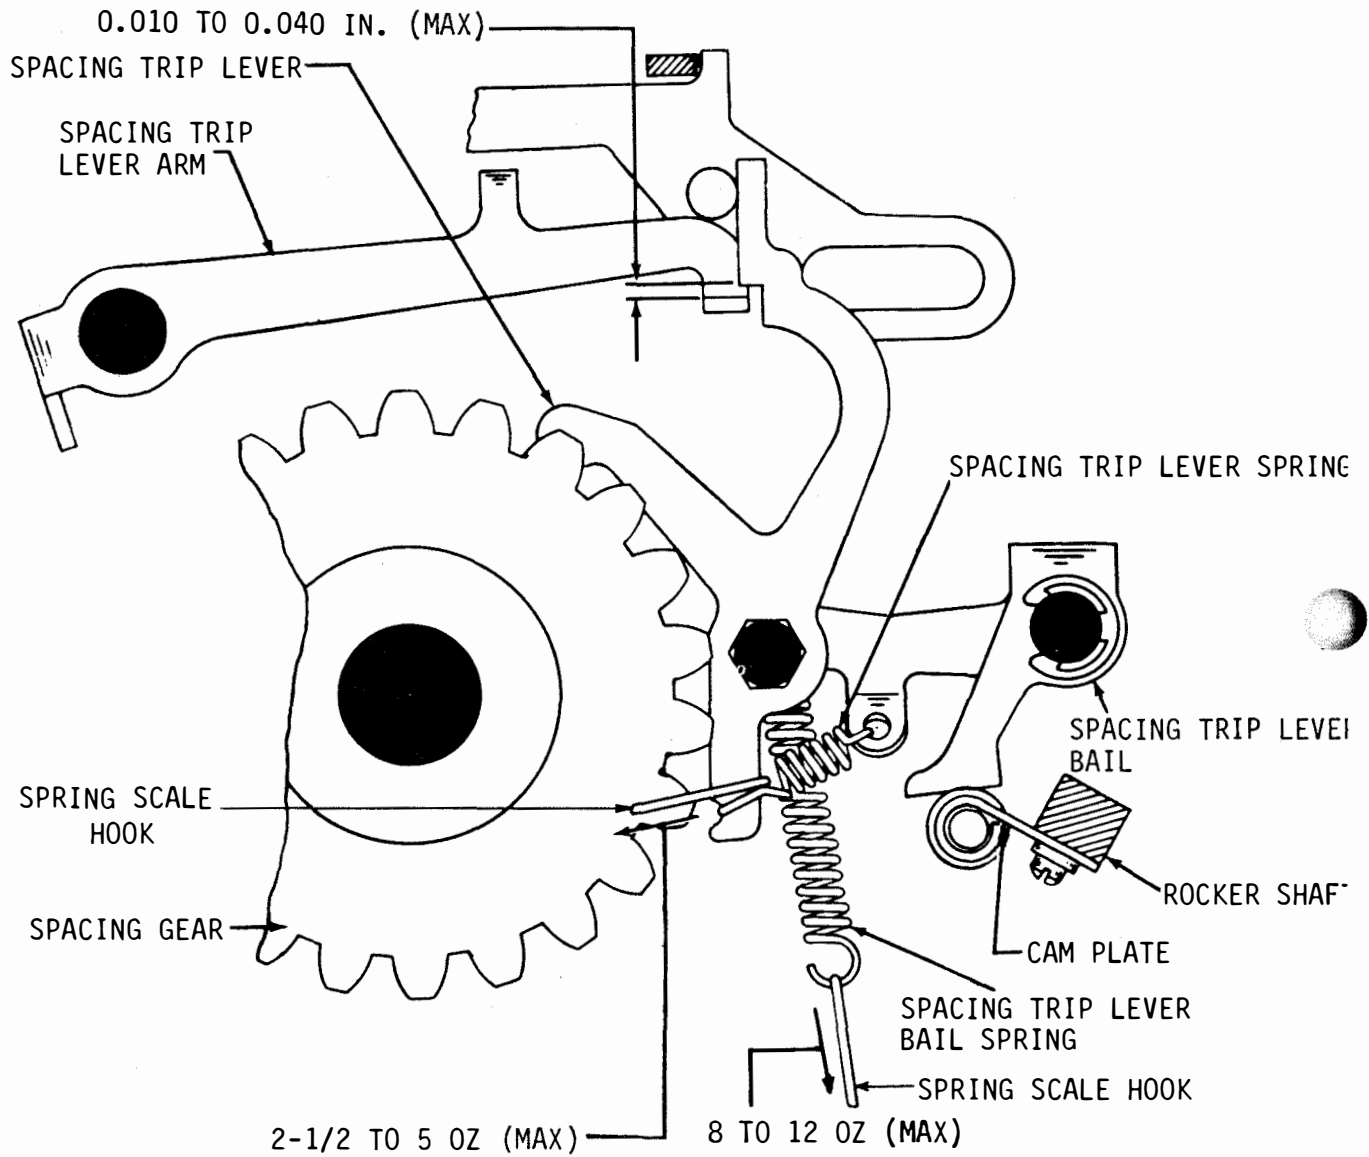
Spacing Trip Lever Bail Cam Plate, Trip Lever Bail Spring, and Trip Lever Spring, Left Side View
